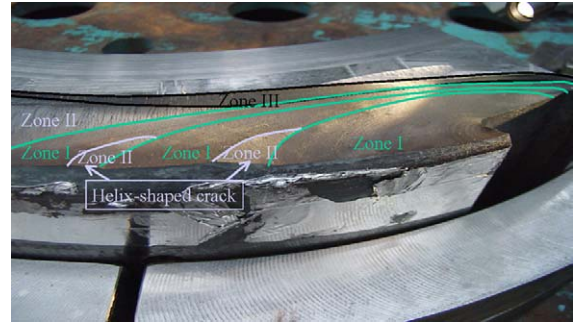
Propagation zones for the crack in a deposited LP1 turbine.
